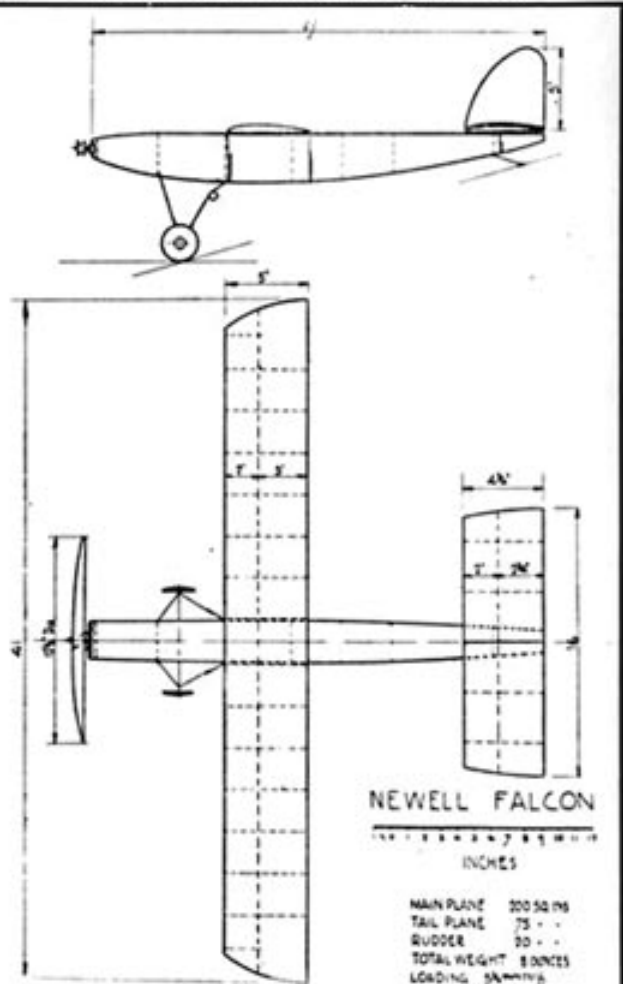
Elevation and Plan of Mr. Newell's Monoplane, "Falcon."
